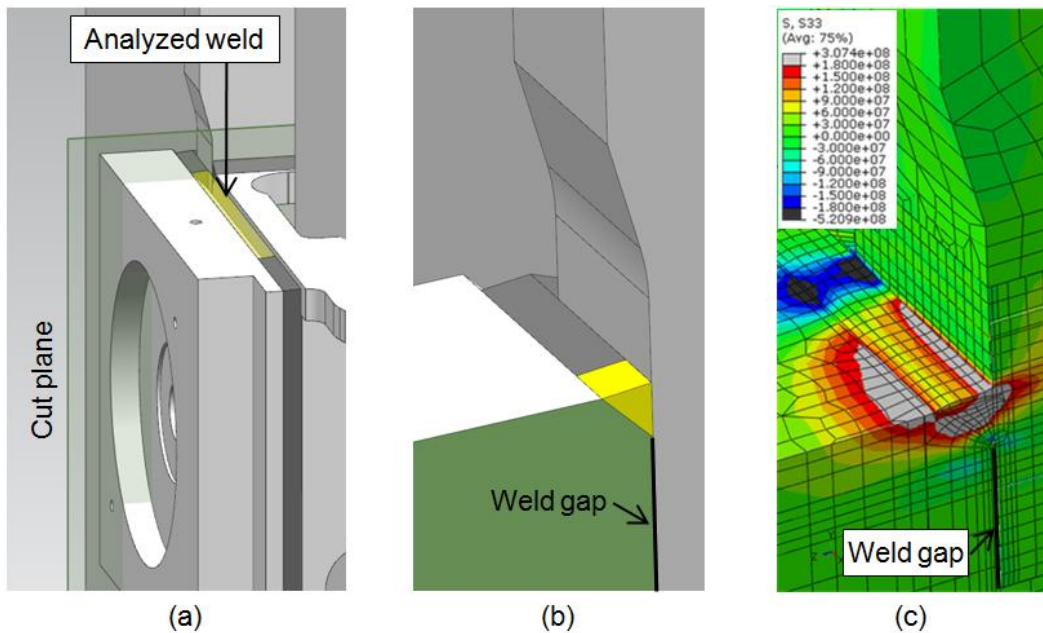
Simulation of welding process a) analyzed weld b) cut view c) stress field perpendicular to weld gap.
